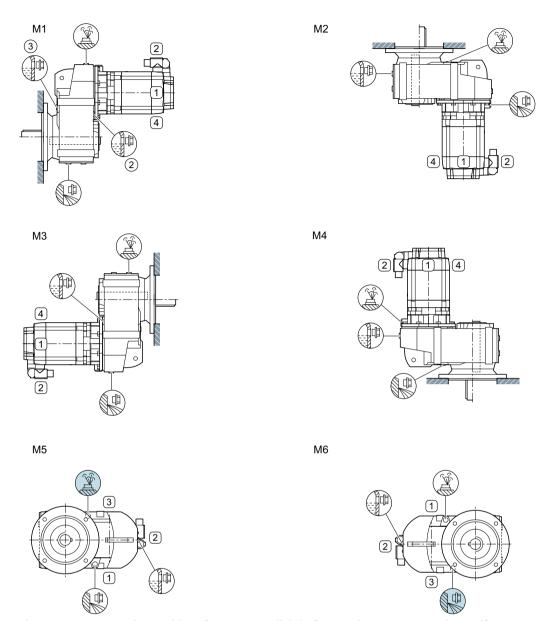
Mounting positions for servo parallel shaft geared motors FZ.F and FD.F (flange-mounted design) and FZ.Z and FD.Z (housing flange design), frame sizes 39 - 129, 2 stage and 3 stage
